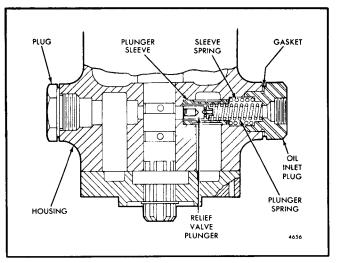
Location of Oil Relief Valve Plunger, Plunger Sleeve, Springs, Oil Inlet Plug and and Dummy Plug in Governor Housing (R.H. Governor Shown)
